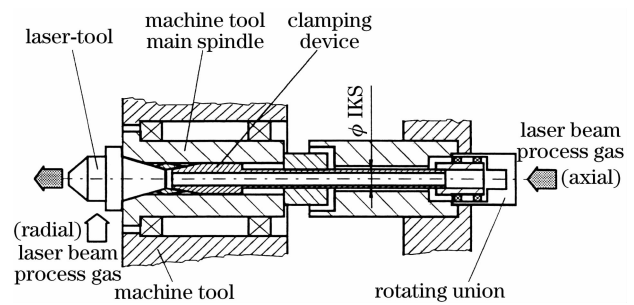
Concept of radial and axial beam delivery in a milling machine^[31]
